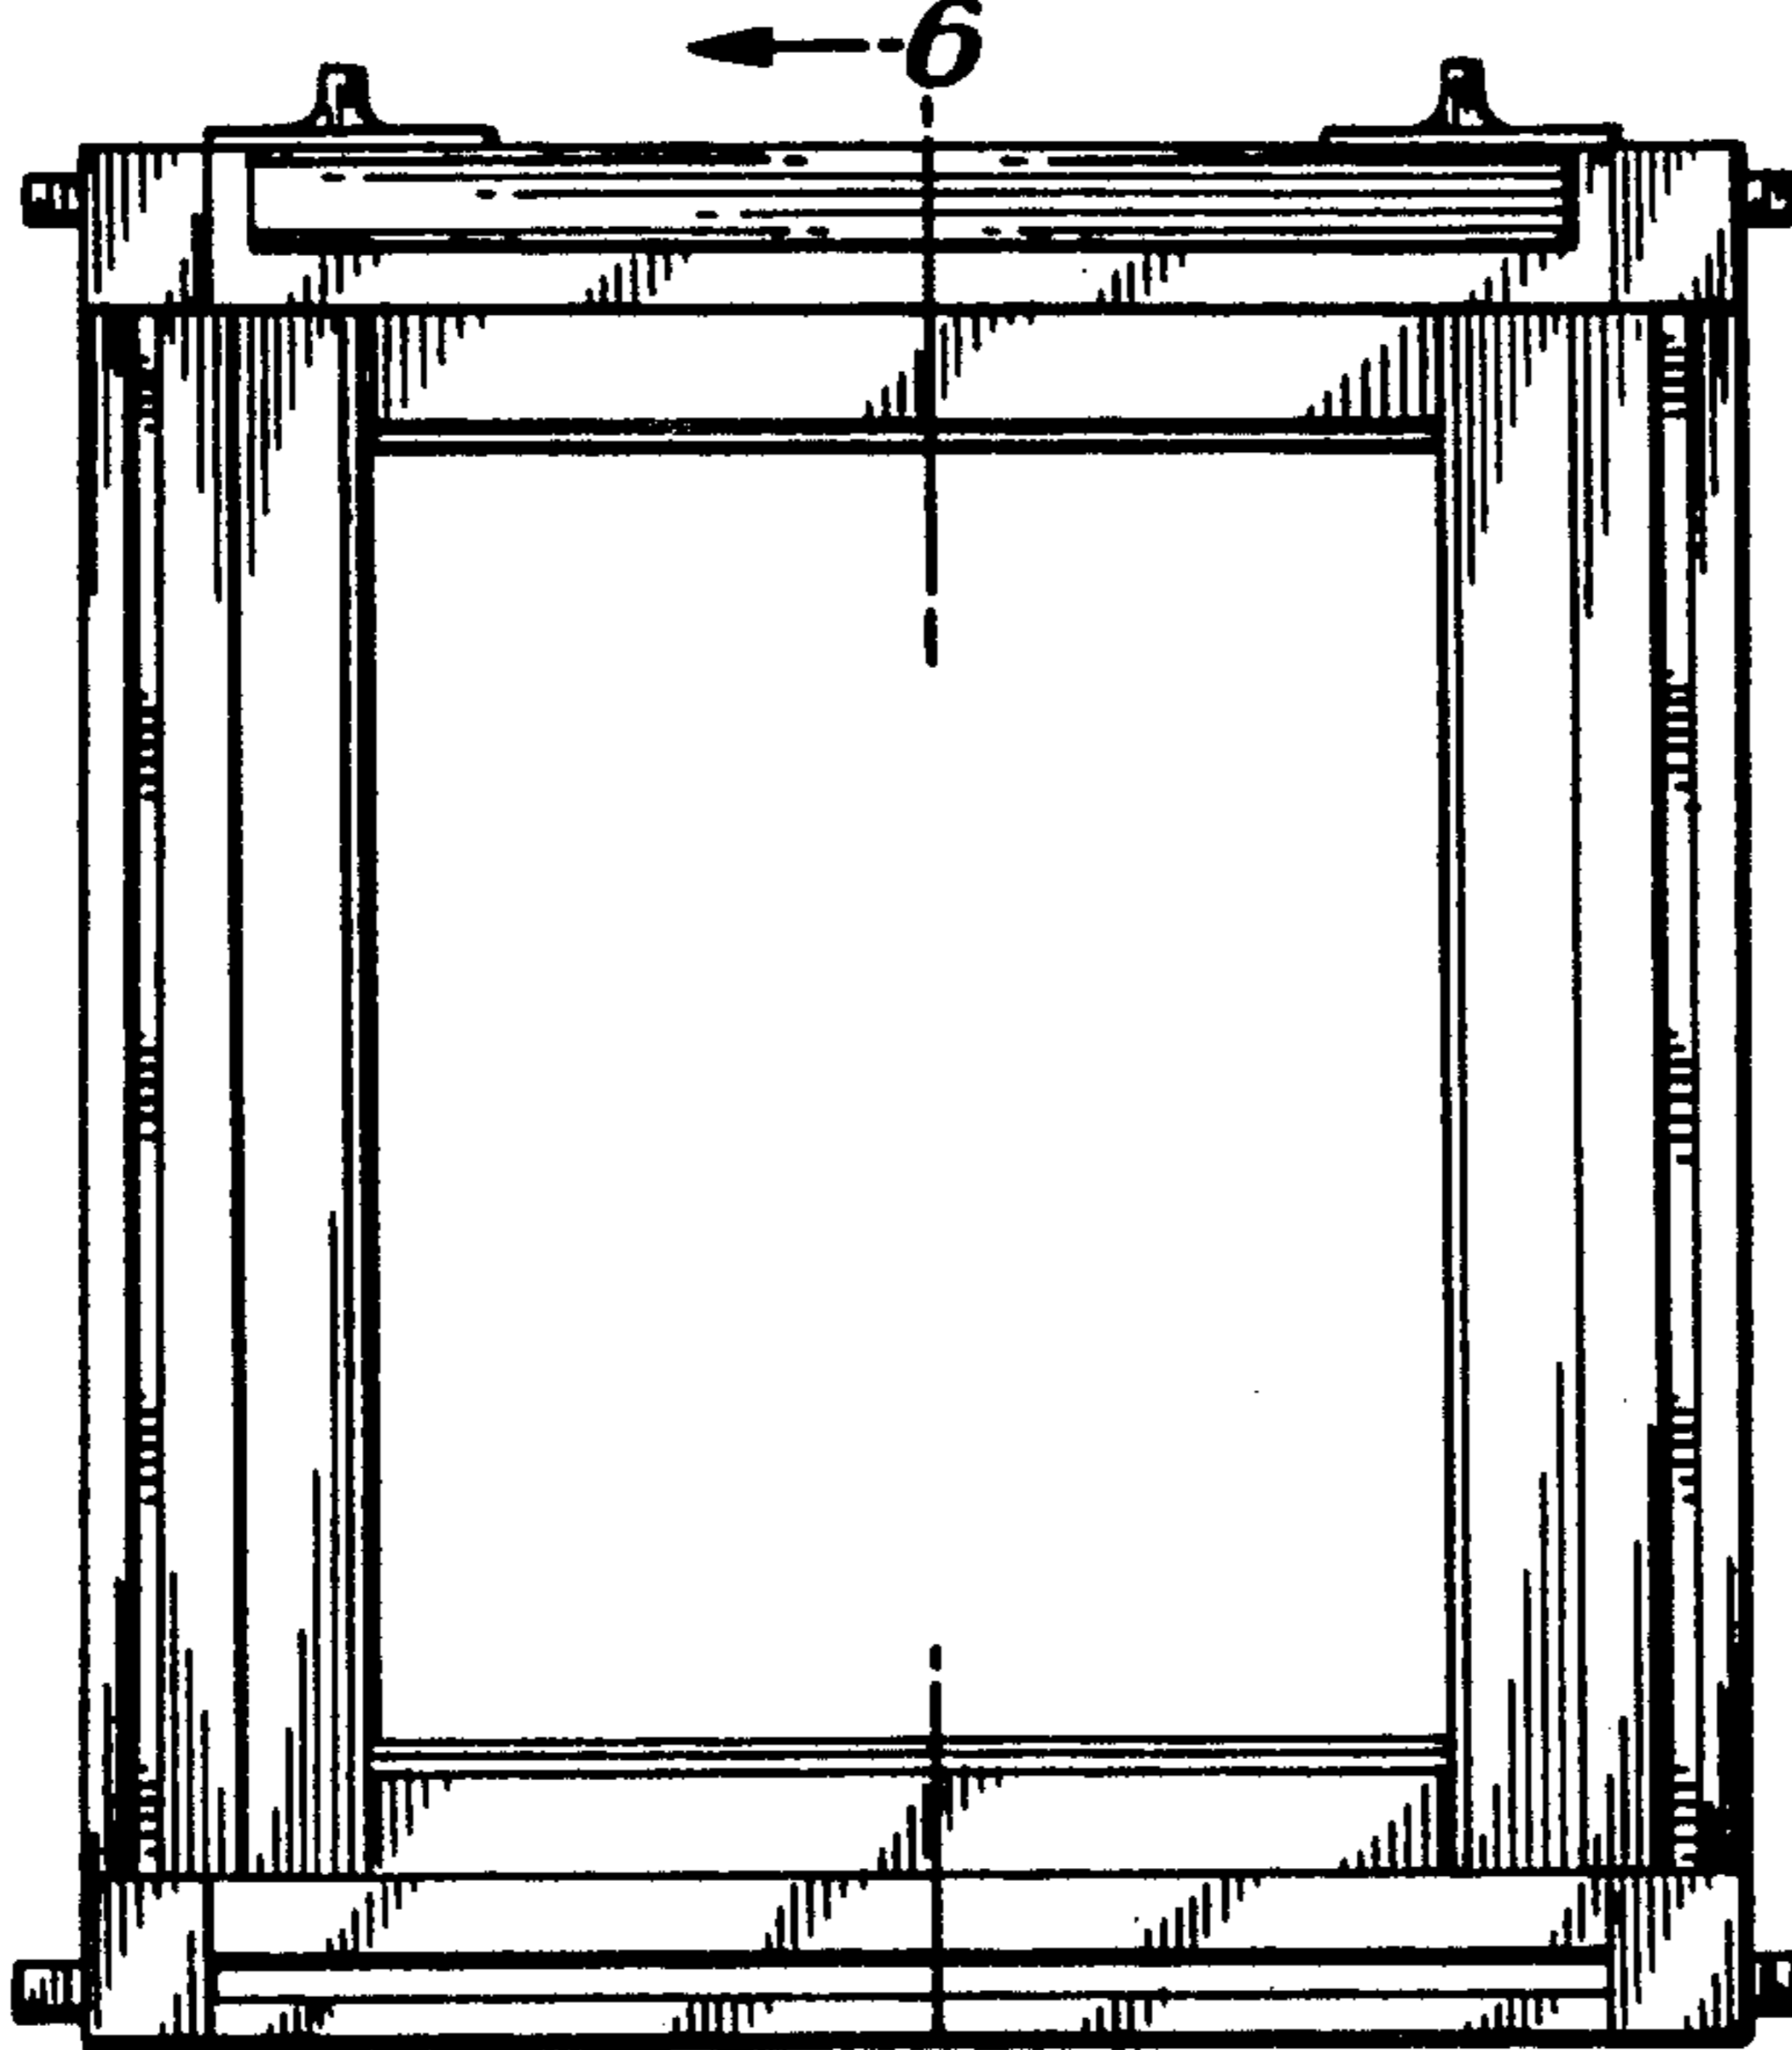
is a front elevation view of the extruded window sash showing my new design;
